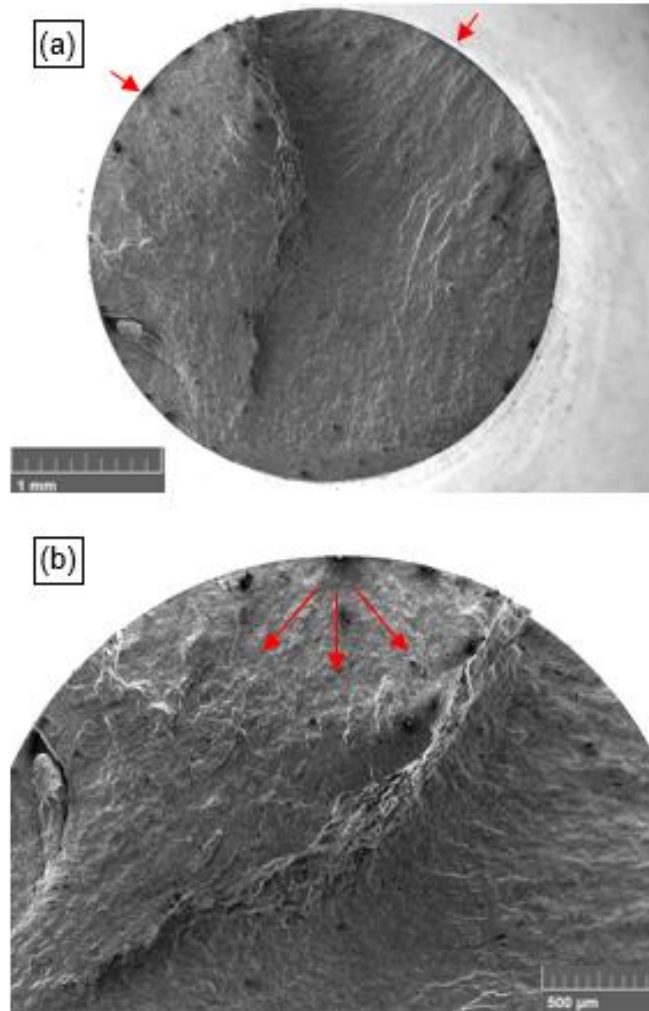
SE fracture surface images of a wrought Inconel 718 specimen tested at $\sigma_a = 700$ MPa with a corresponding fatigue life of $2N_f = 1.26 \times 10^5$ reversals. The overall fracture surface is presented in (a) with red arrows pointing to crack initiation sites. One of two crack initiation sites is highlighted in (b).
